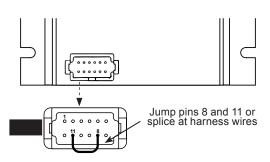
Reuse Exisiting FLD wire for IGN by Jumping Harness Sockets
